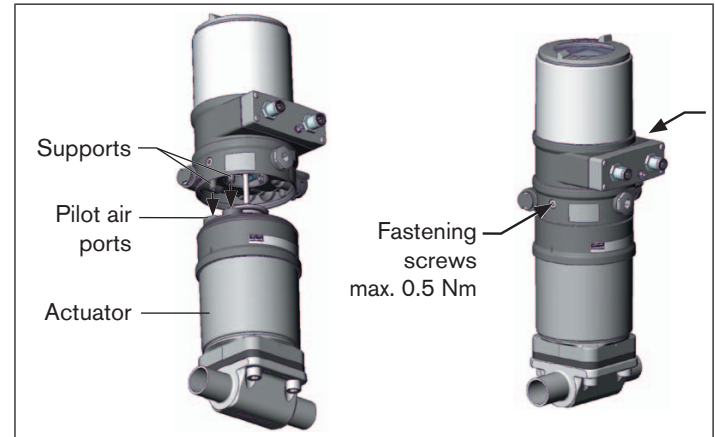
Aligning the puck holder, series 2103, 2300 and 2301
